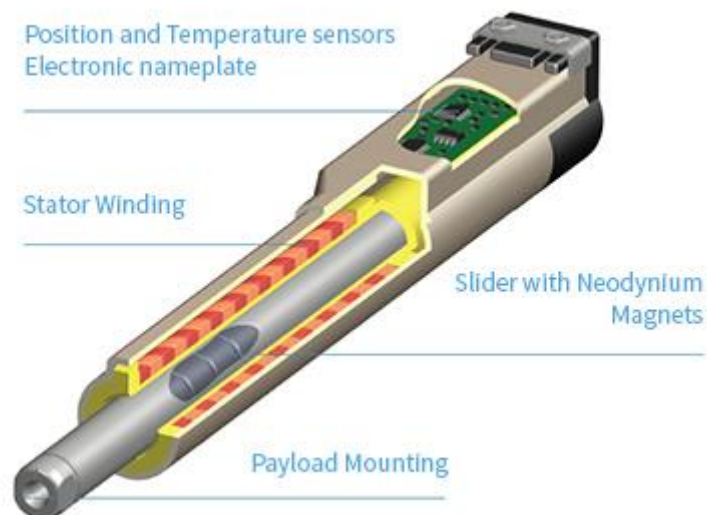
Linear Direct drive motor schematic view comprising stator and winding working against neodymium magnet inside the slider⁸
